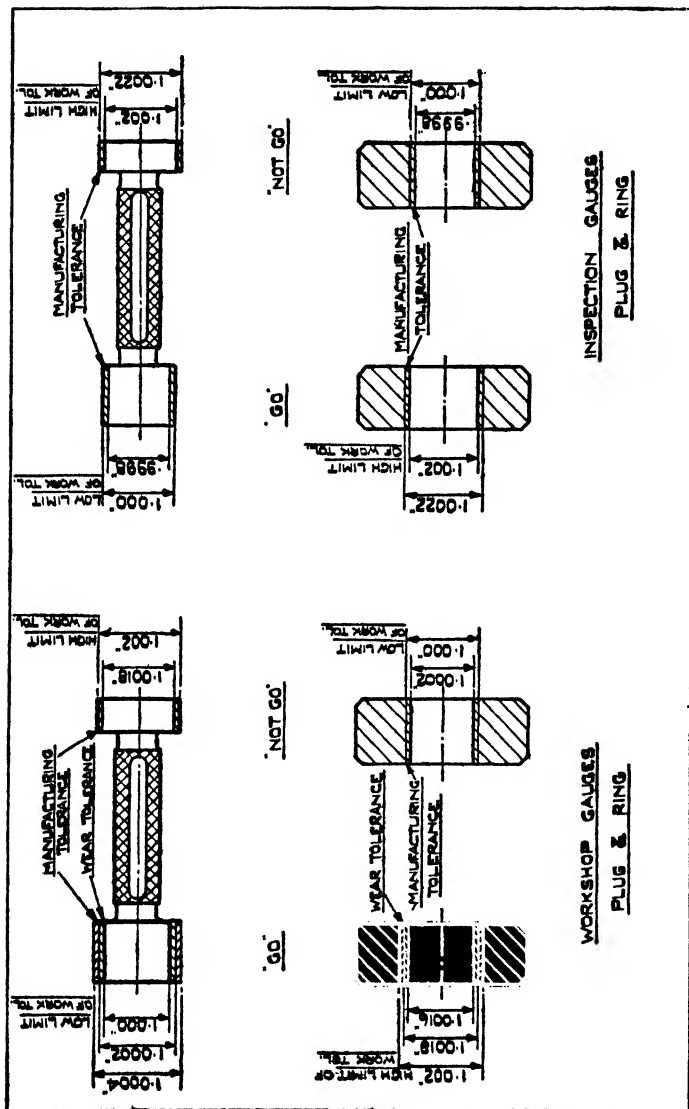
THEORY OF GAUGE TOLERANCES ILLUSTRATED
